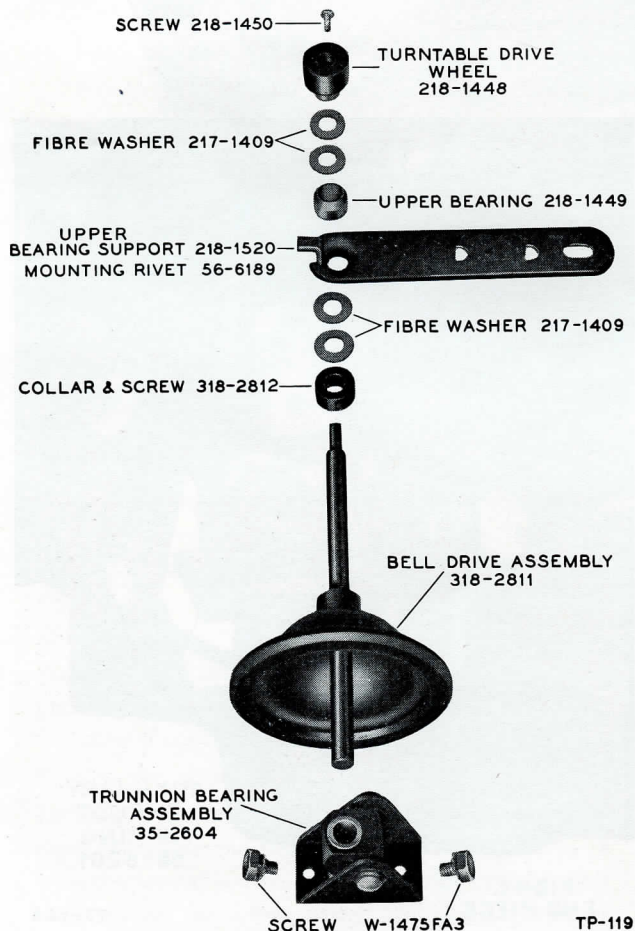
CORRECT ASSEMBLY OF BELL DRIVE
